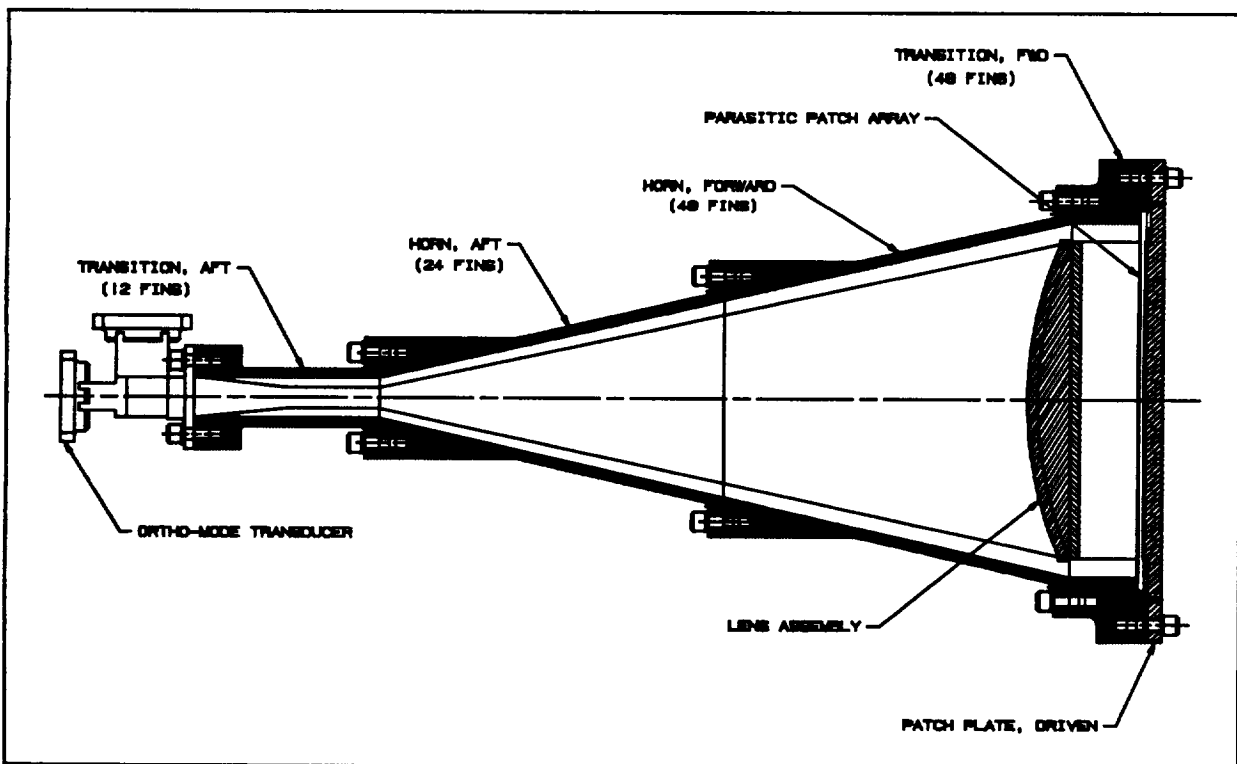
Cross-sectional view of the Phase II OSPC amplifier assembly.
